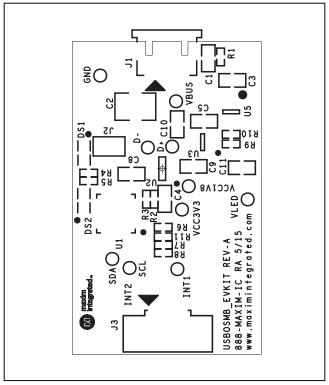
USBOSMB Mother Board Component Placement Guide—Component Side
